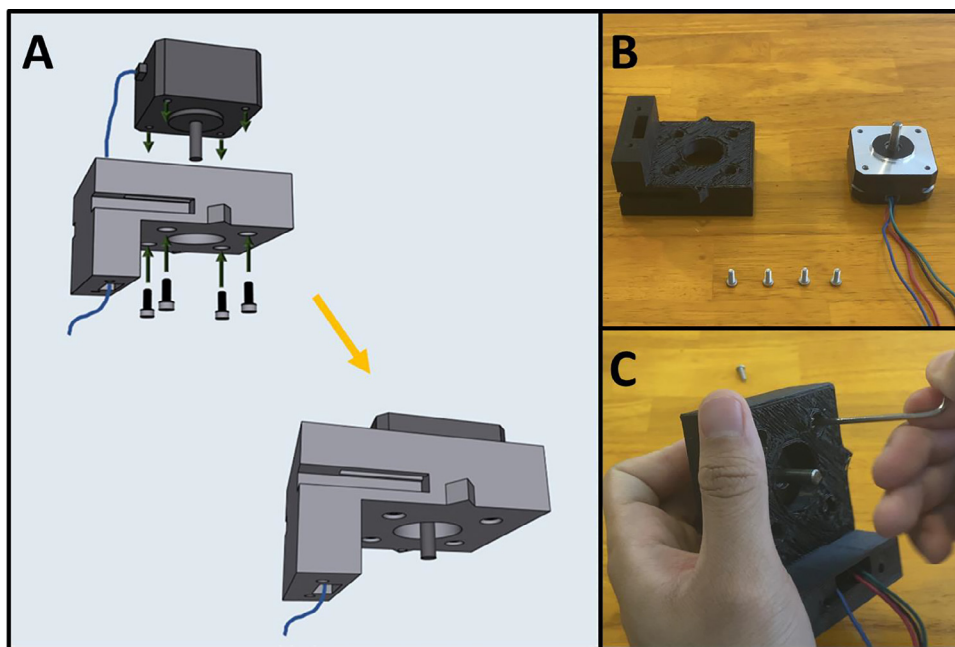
a-c: The procedure for mounting the upper stepper motor.
